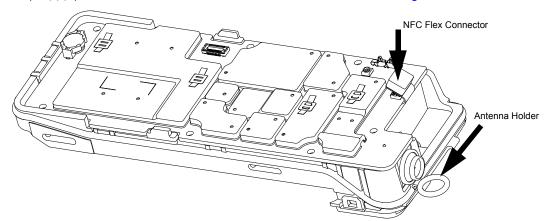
Assemble the Main O-Ring at Antenna Holder
